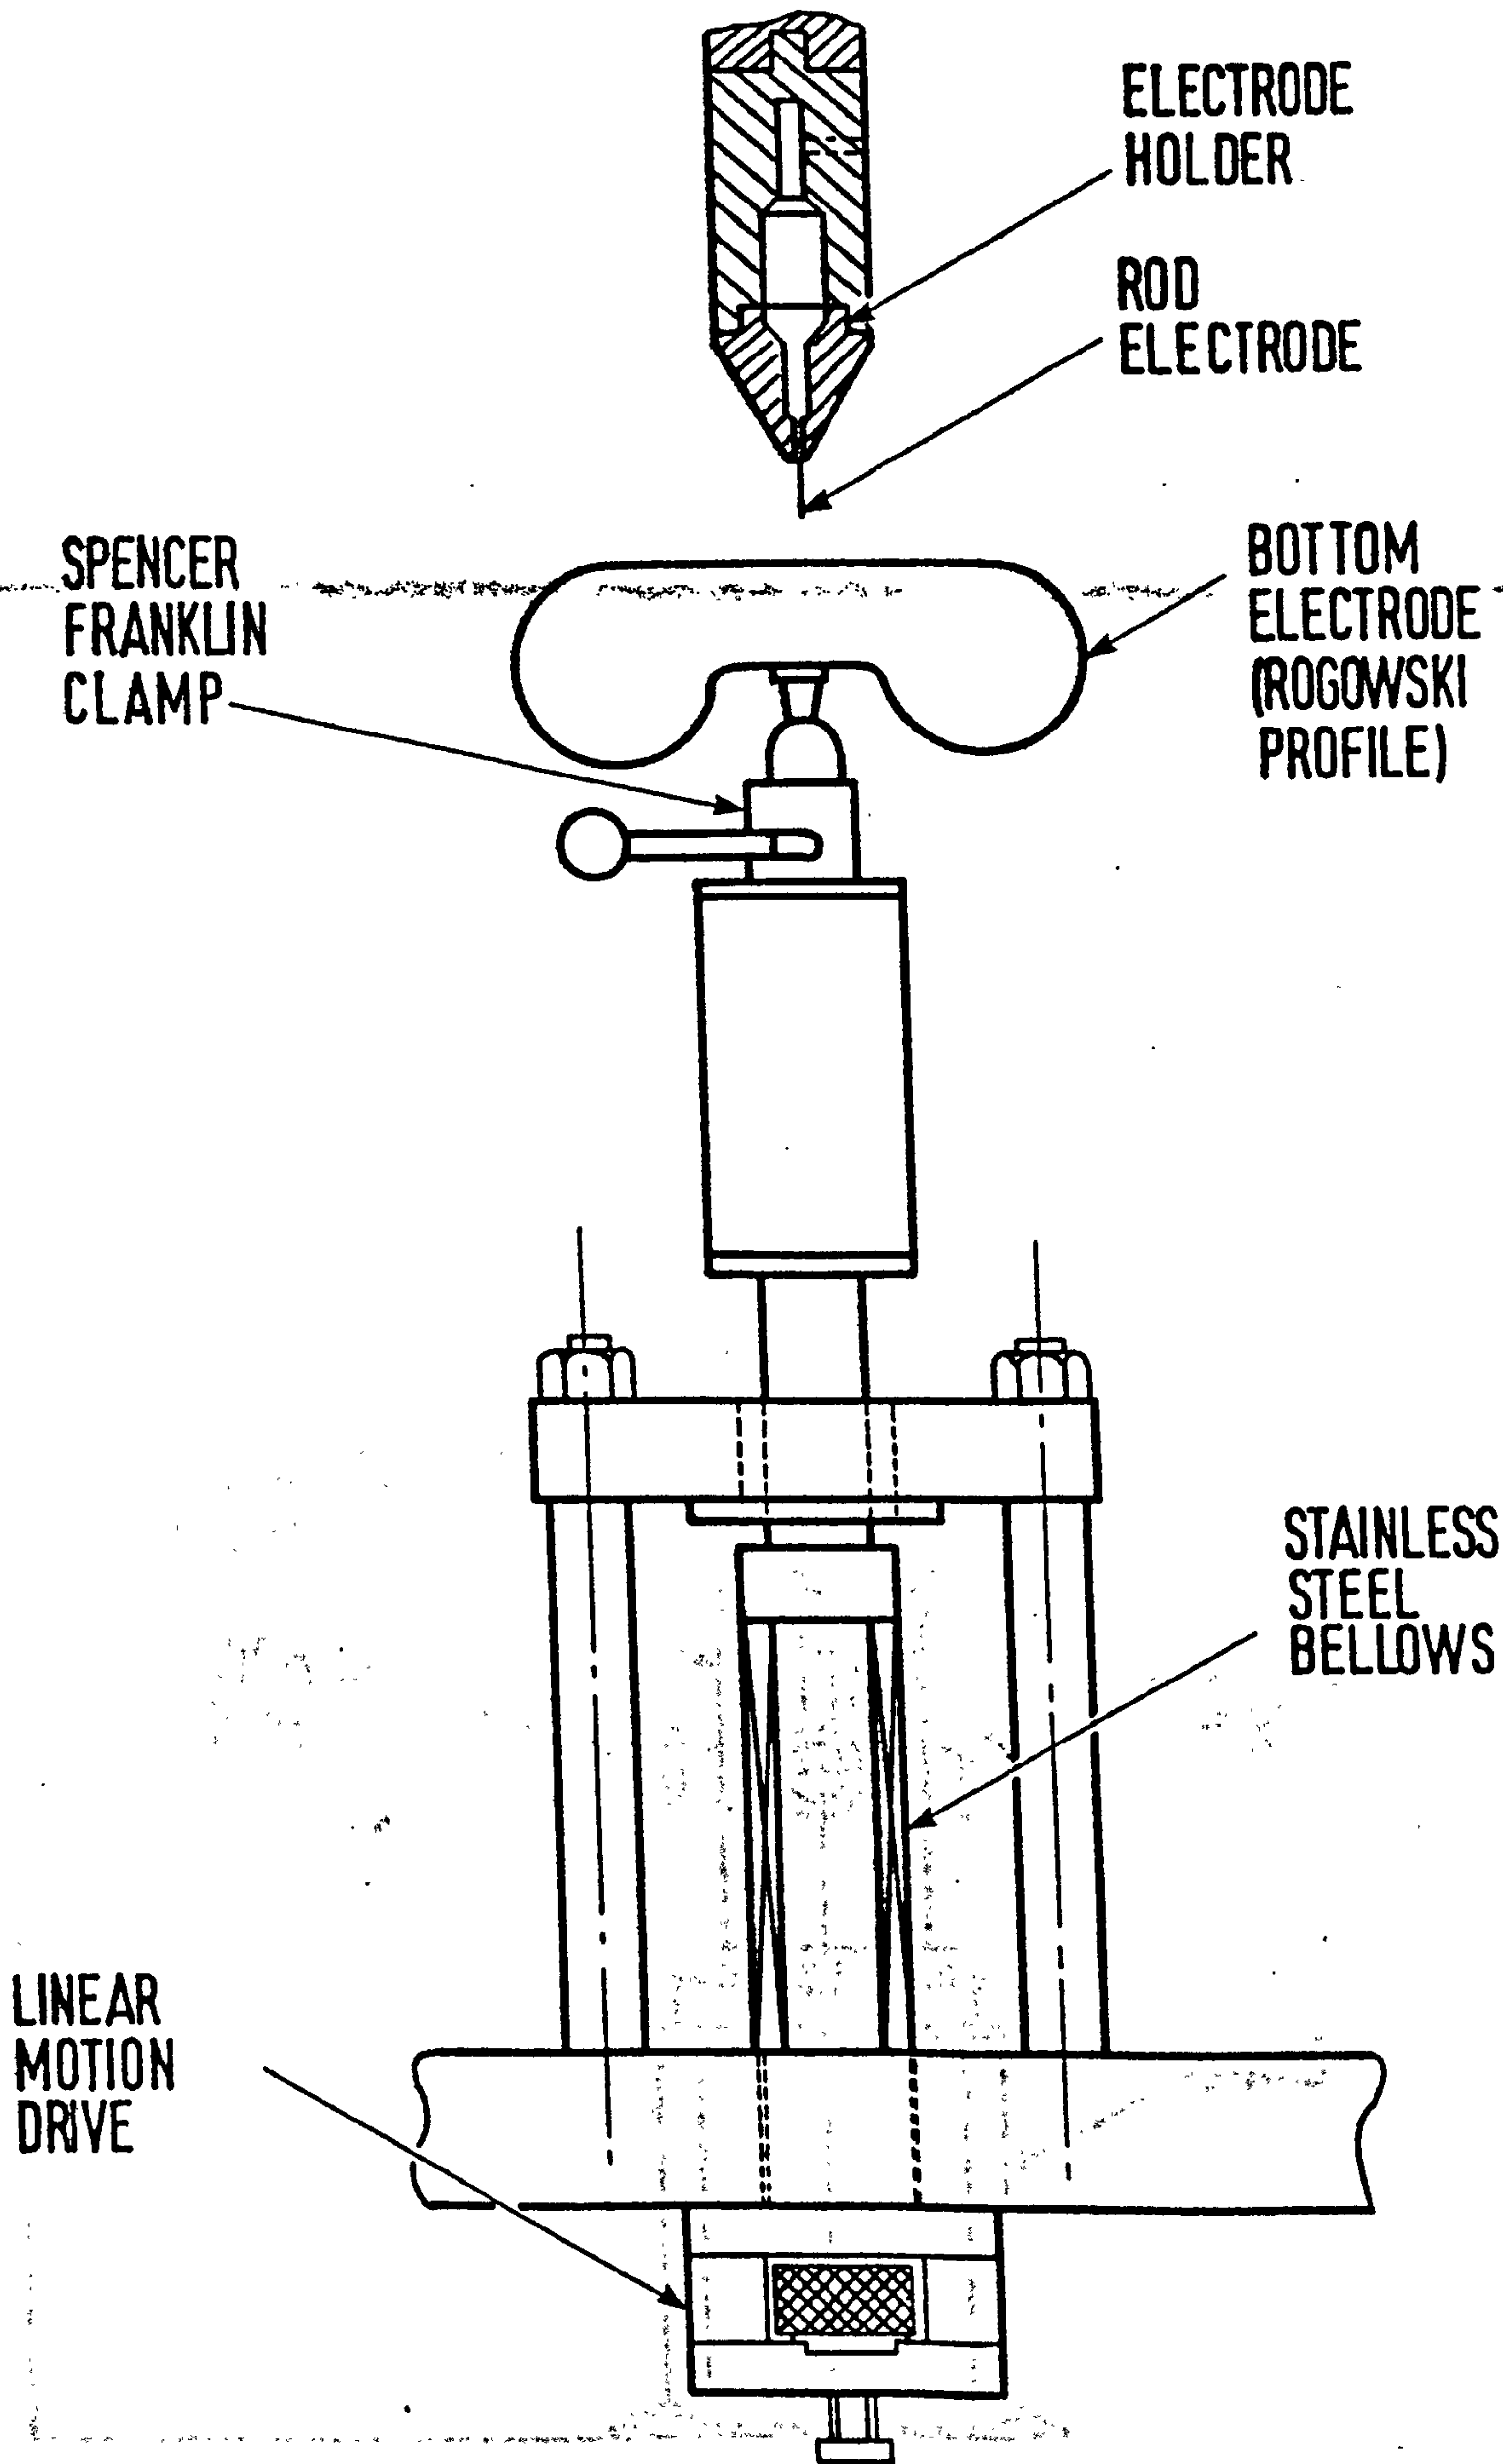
DEW ELECTRODE SUPPORT ASSEMBLY
